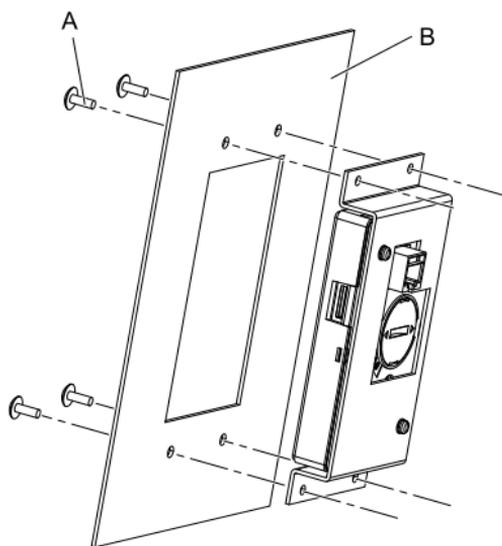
Mounting the Keypad to Installation Support Set A
